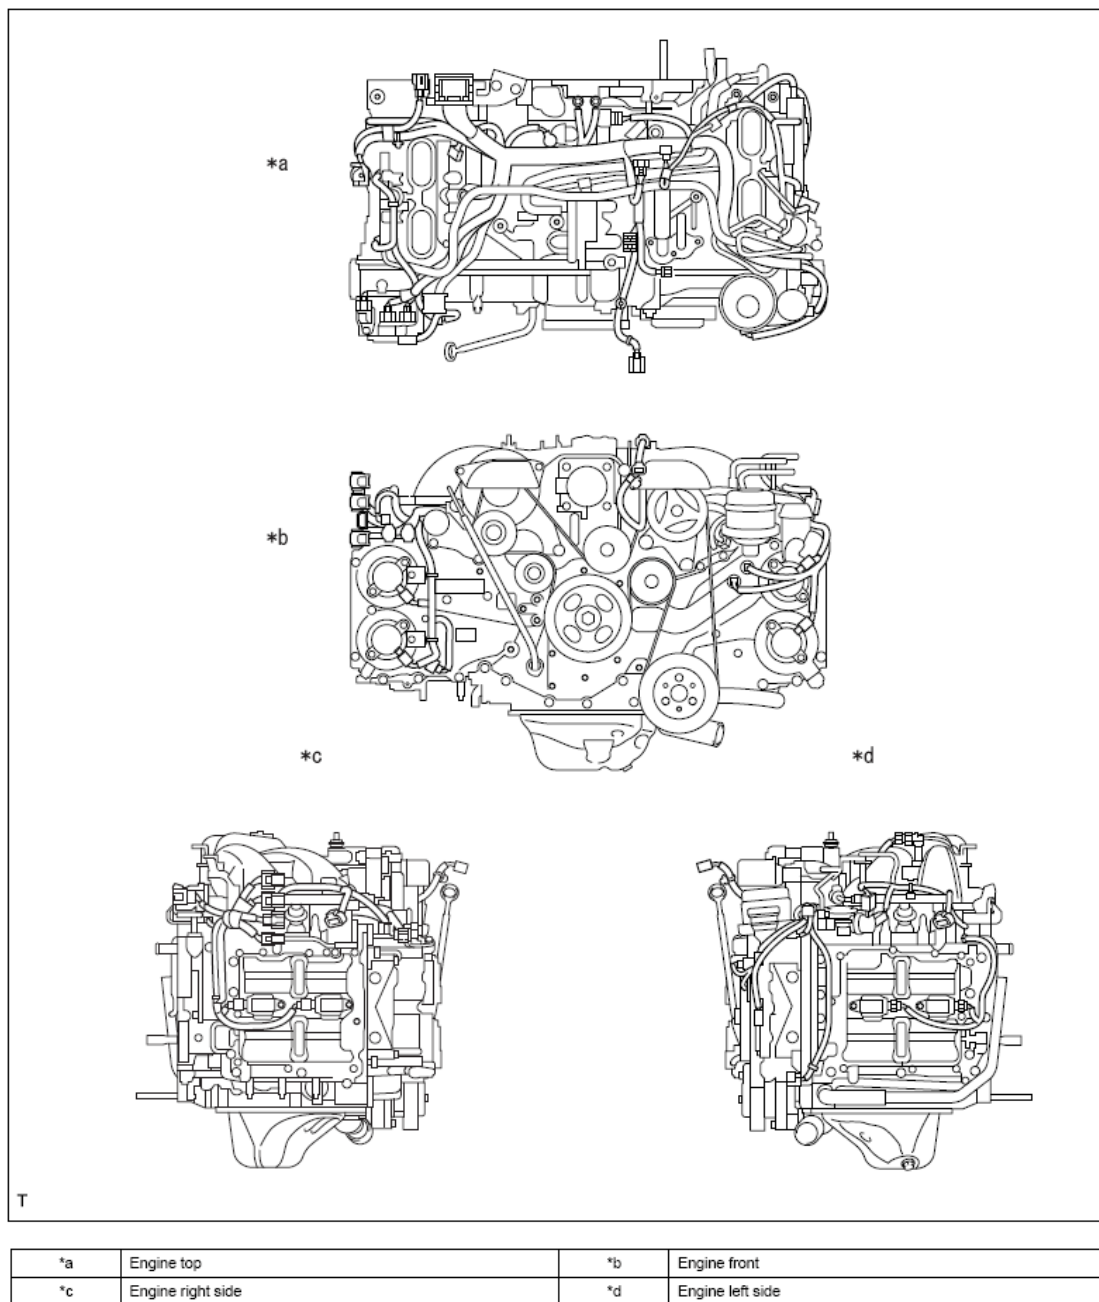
Identifying Engine Top And Front Of Engine Right And Left Side
